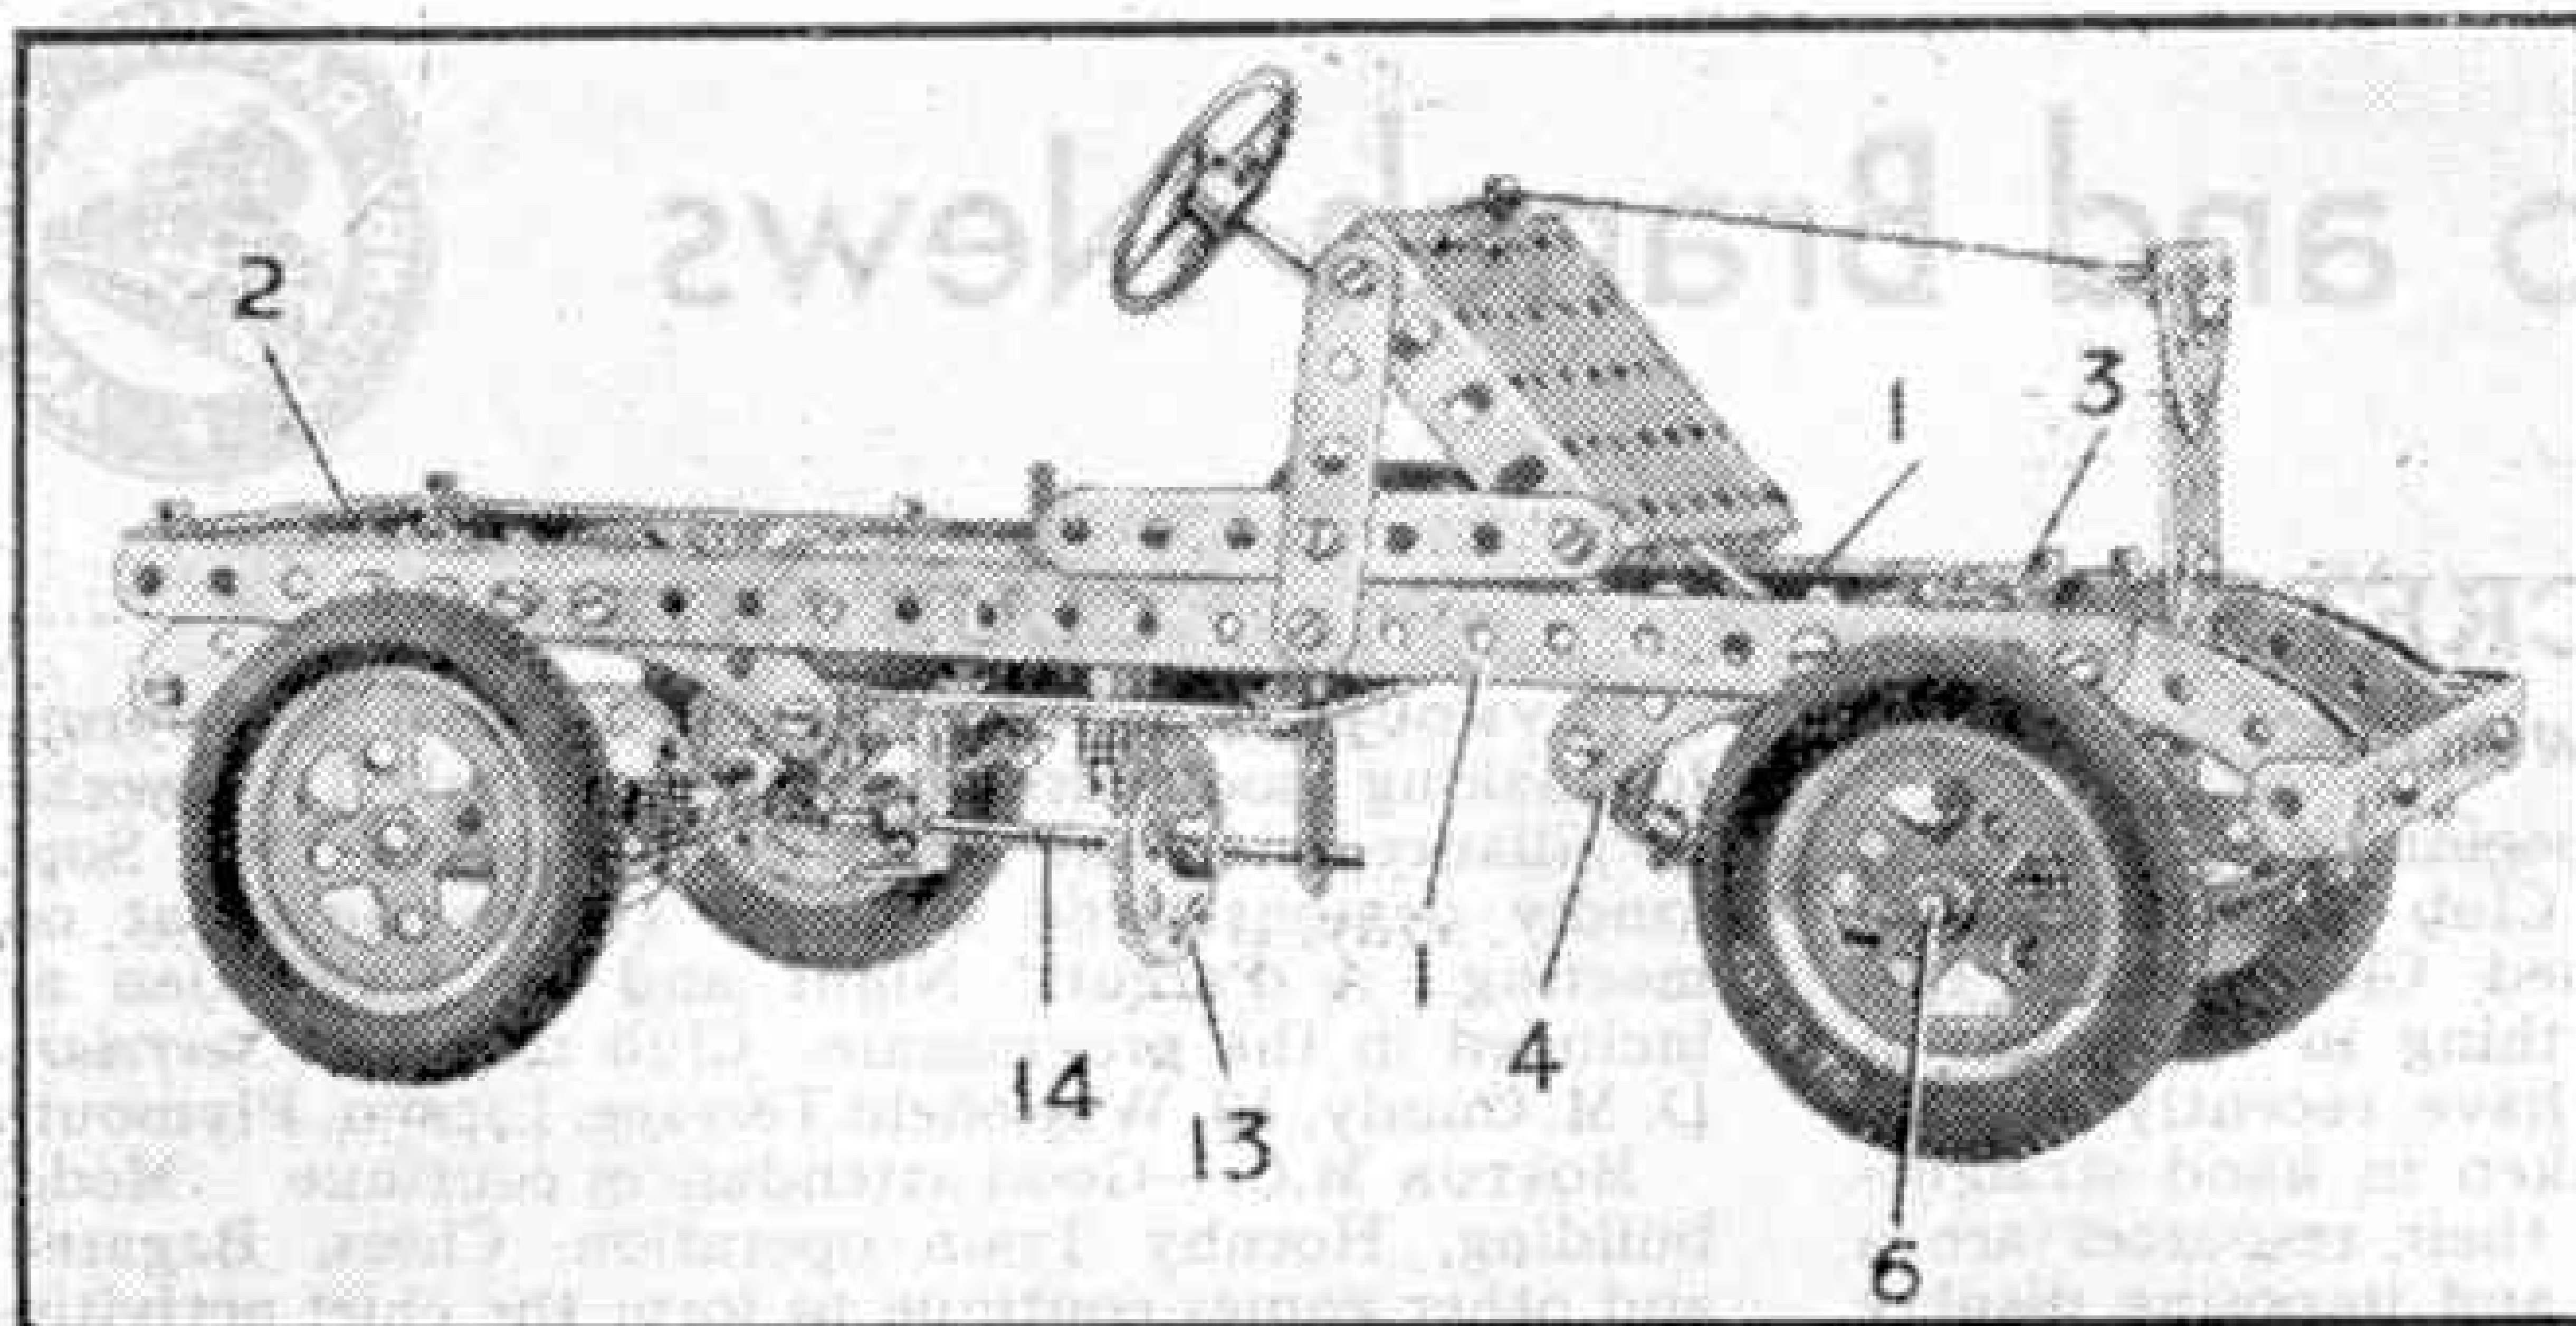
A simple motor chassis driven by a Meccano No. 1 Clockwork Motor.
